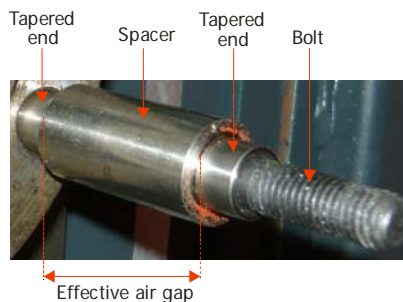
Spacer for maintaining constant air gap. The rotor disks are connected together and to the hub bearing by passing a bolt through the spacer. The tapered end ensures that the distance between the disks remain constant.
